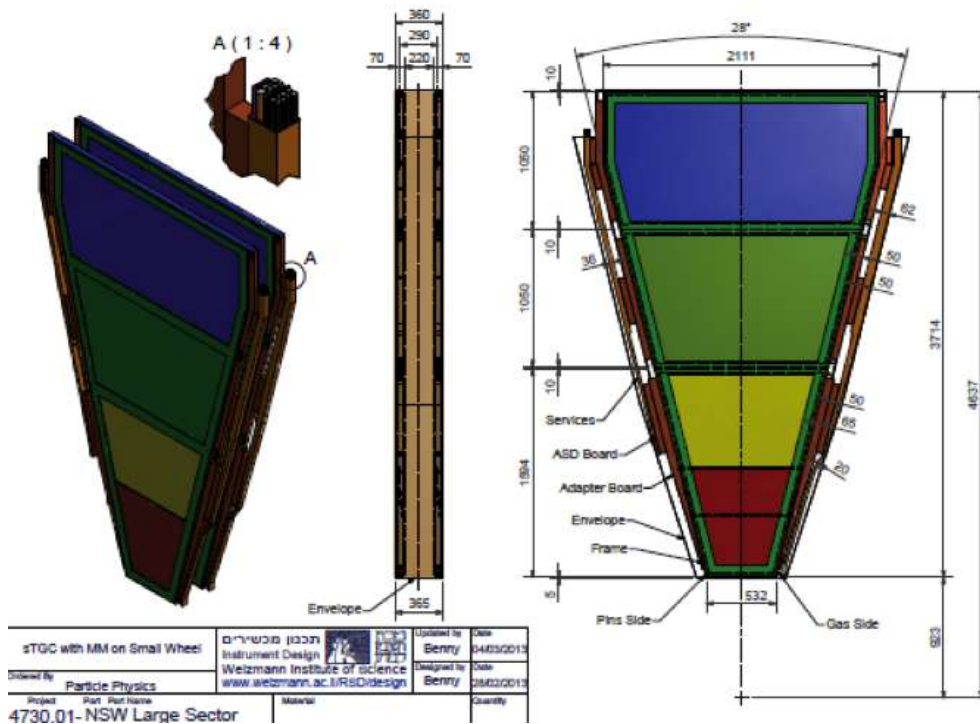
Large sector arrangement, including glass fibre frames, electronic channels adapter boards, front-end electronics and services.
